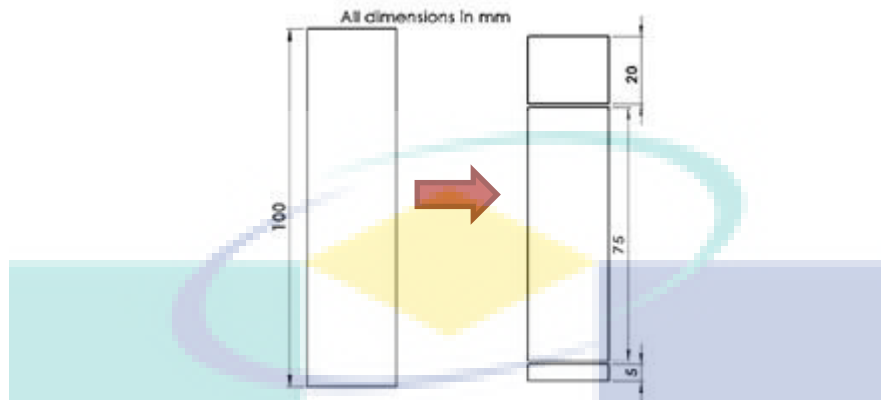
Schematic for feedstock billet after DTM with initial and final dimensions.
